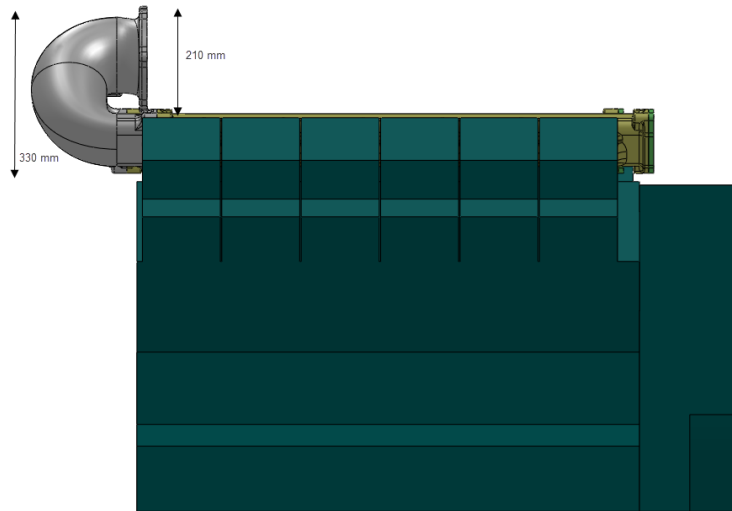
Rough dimension drawing for Rocket sled concept, side view
